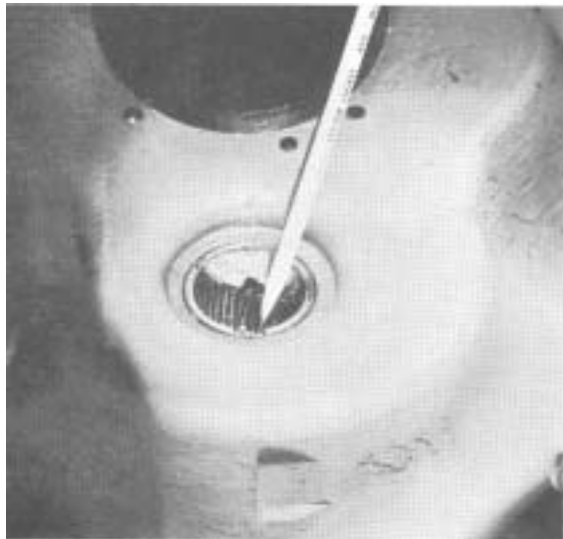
Coat countershaft pilot bearing needles with heavy grease to hold in place until countershaft is installed.
